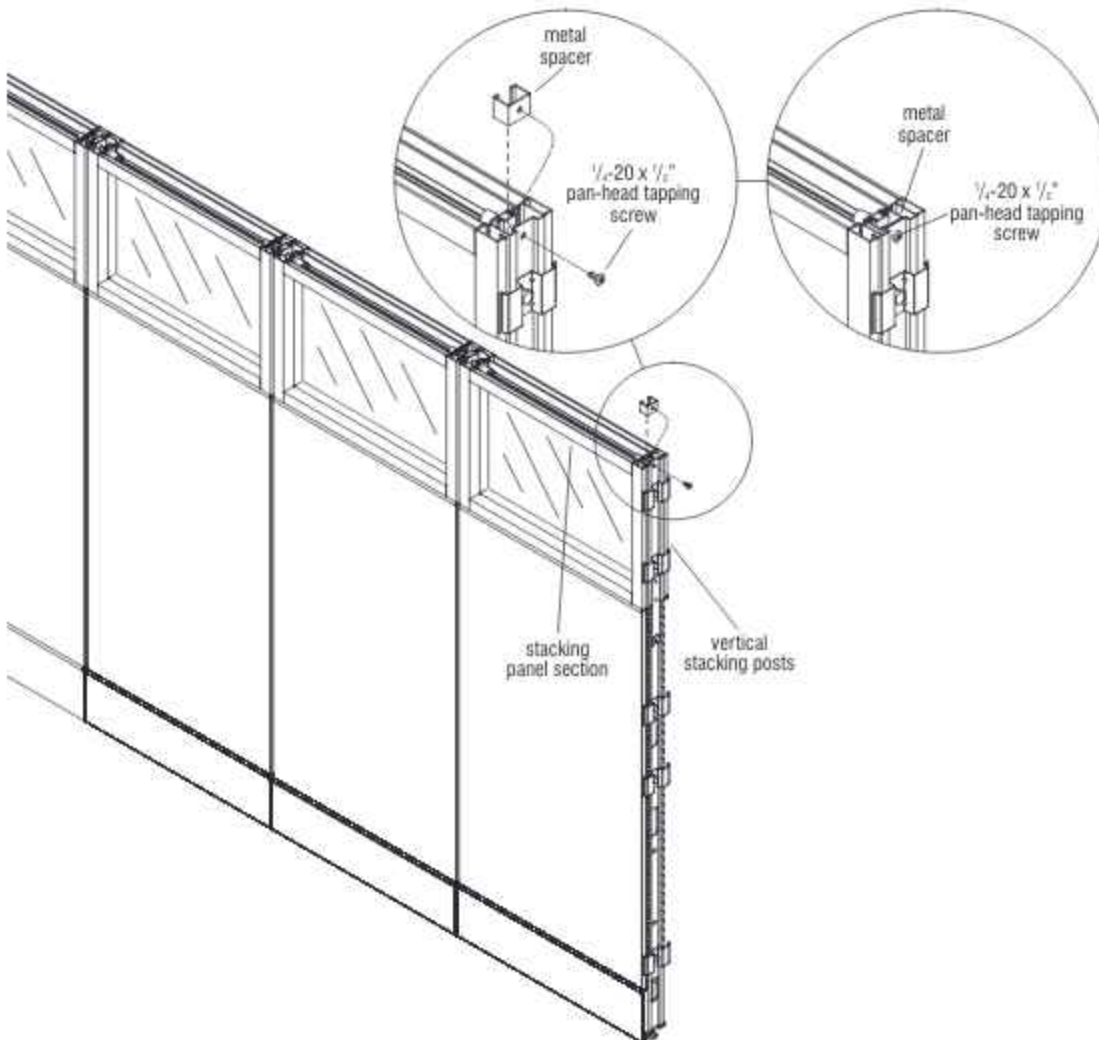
Stacking Sections (aluminum frame) - Full-Height Intersection
